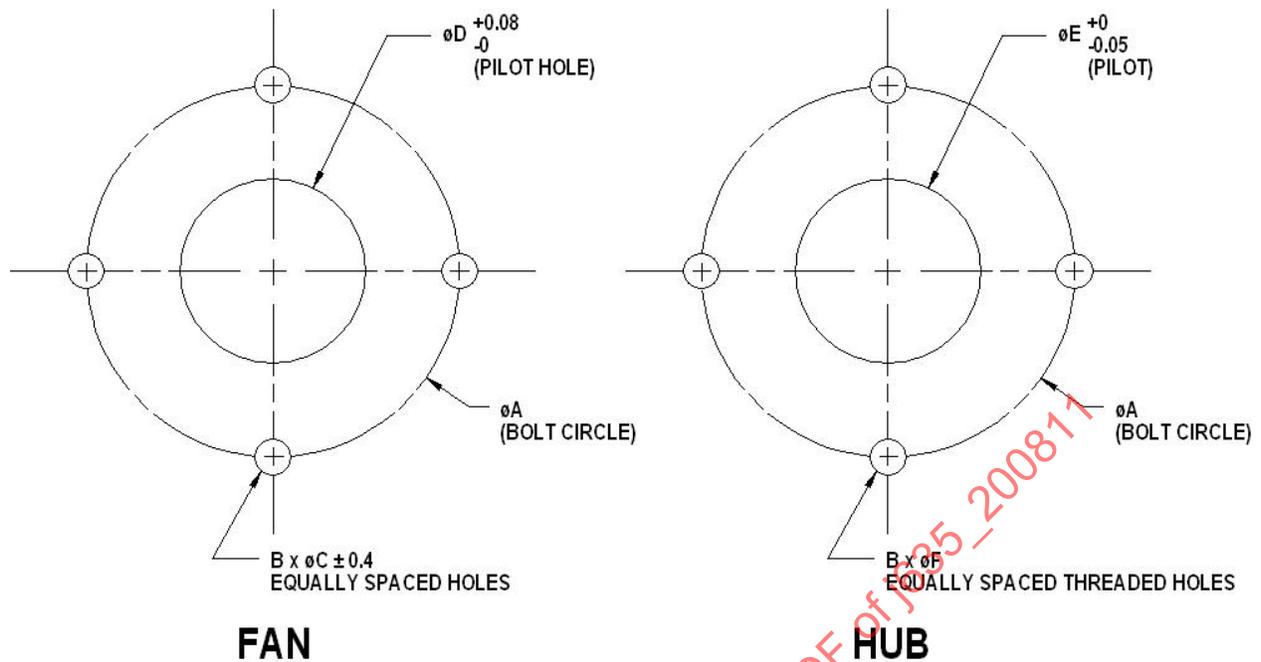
FIXED DRIVE MOUNTING PATTERNS
